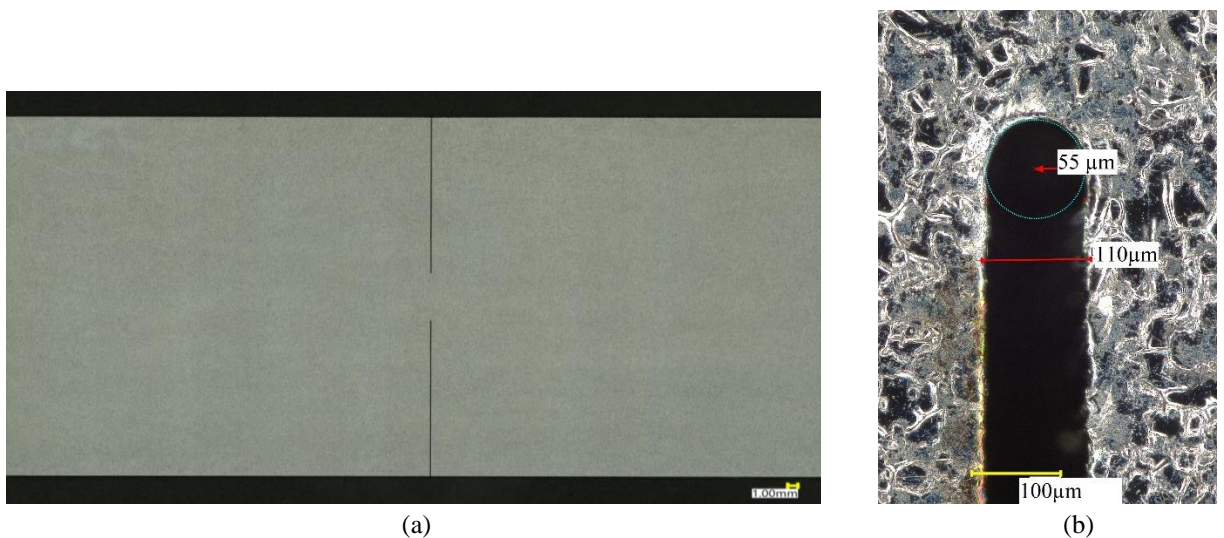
(a) EWF testing sample prepared using laser cutting; (b) Notch tip dimensions from laser cutting.
